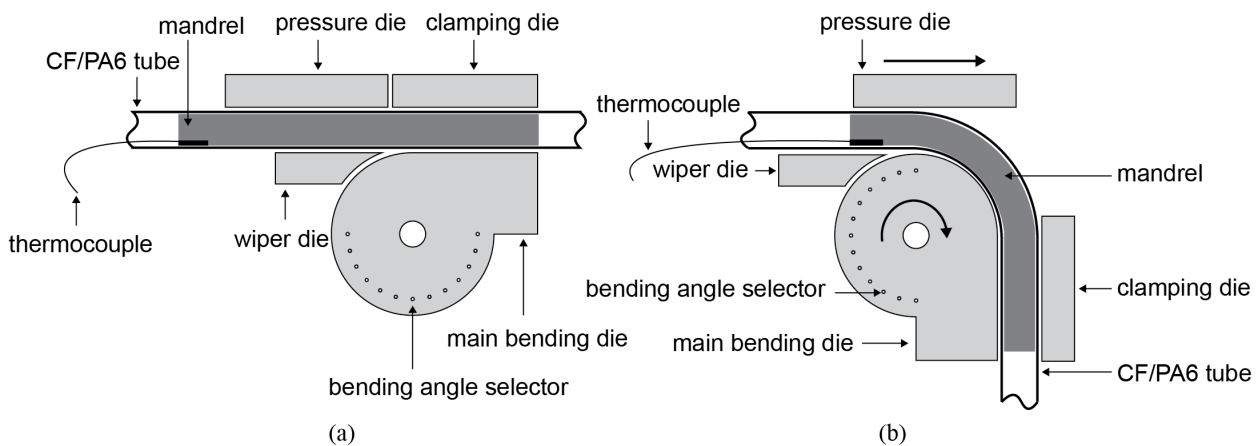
RDB operation for CF/PA6 tubes (a) tube loading and heating, (b) tube bending and clamping
